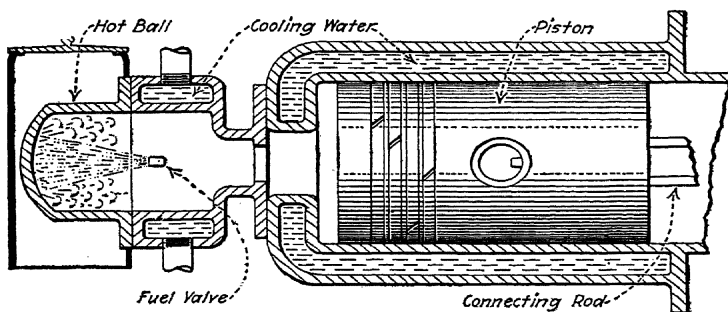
Illustrating the hot-ball method of ignition for low-pressure oil-burning internal-combustion engines.
